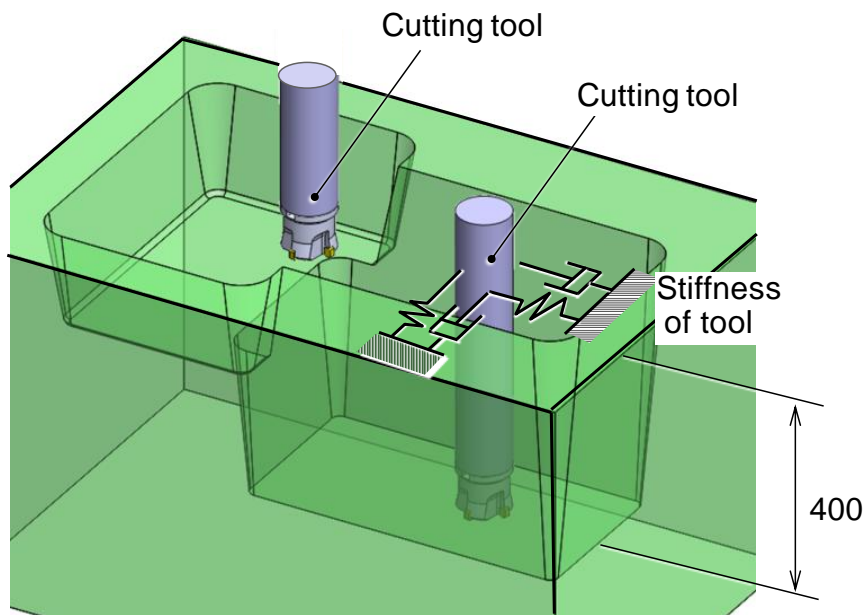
12 Machining of giant parts with a long cutting tool.
